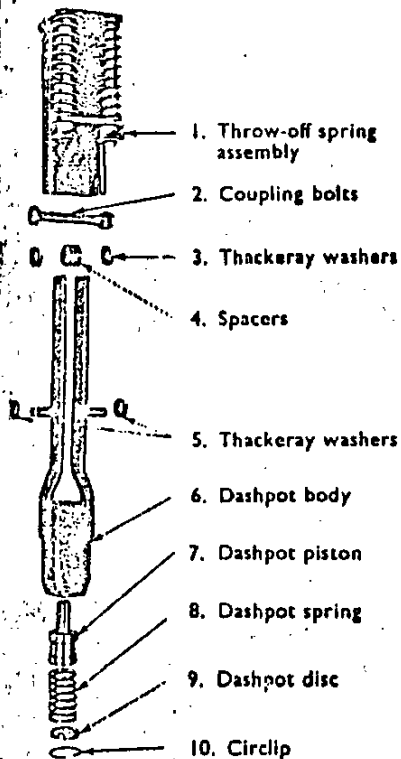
Expanded view of dashpot and throw-off spring assembly
